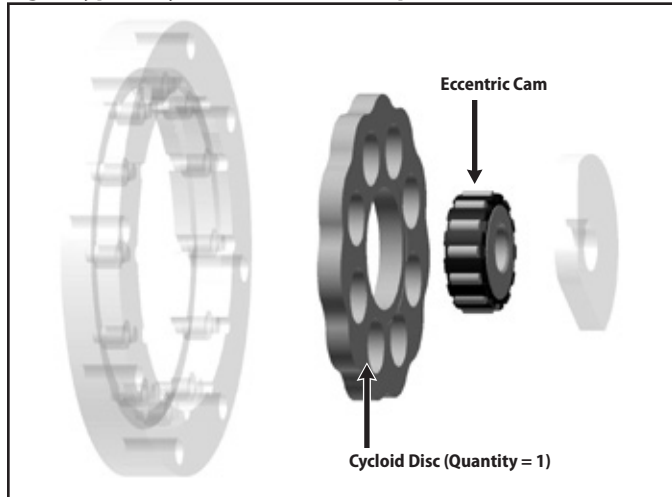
Typical Cyclo® Reduction Components – A6100 thru E6175
